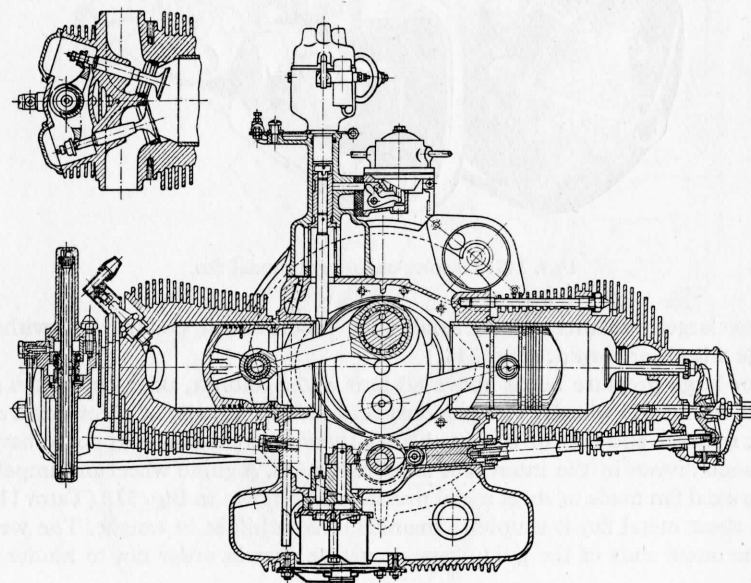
Sectional view of a two-cylinder Panhard-Dyna car engine. Note aluminium cylinder with liner.
